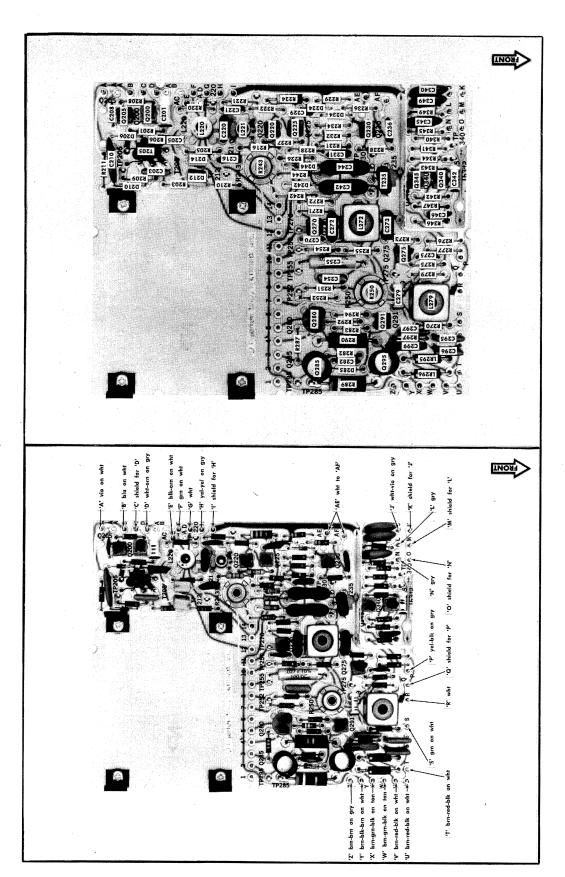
A. SCR board; component identification and wire color code for SN BI50100 through B241879.
